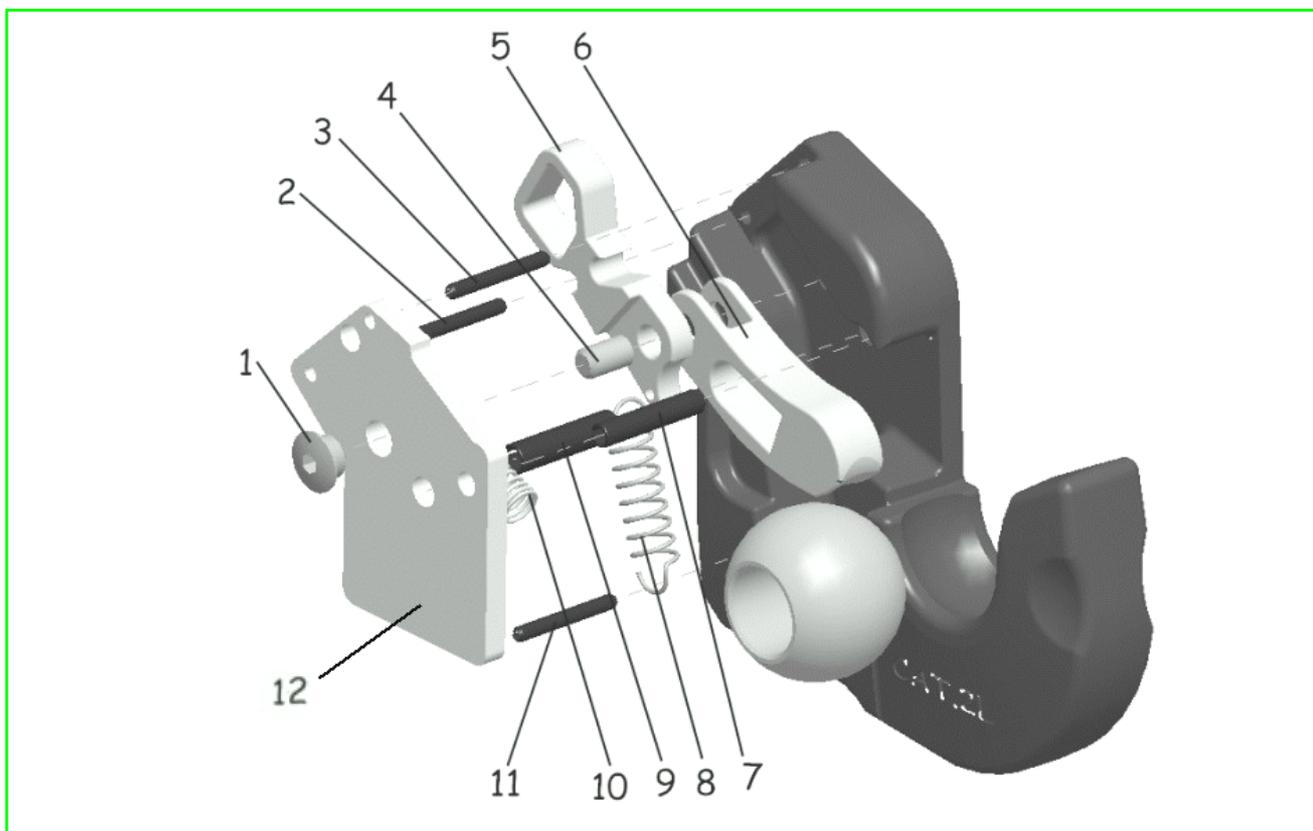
Exploded diagram of the self-locking lower hook. The following parts may be seen: 1) protective plug; 2, 3, 11, reference pins for correct mounting of protective plate; 4) base pin of the closure mechanism; 5) wing nut for manual opening; 6) shutter; 7) stop pin for opening of shutter; 8) return spring of opening wing nut; 9) stop pin to prevent accidental release; 10) return spring of shutter; 12) protective plate welded to hook's body.
